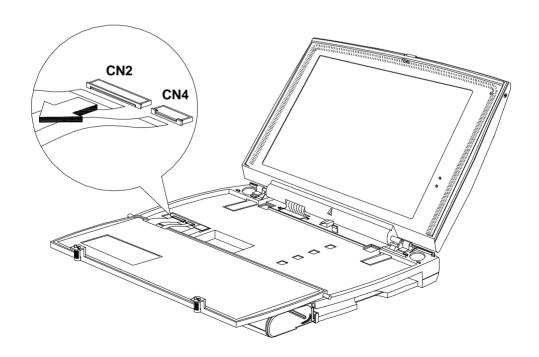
Unplugging the Keyboard Connectors and Removing the Keyboard
